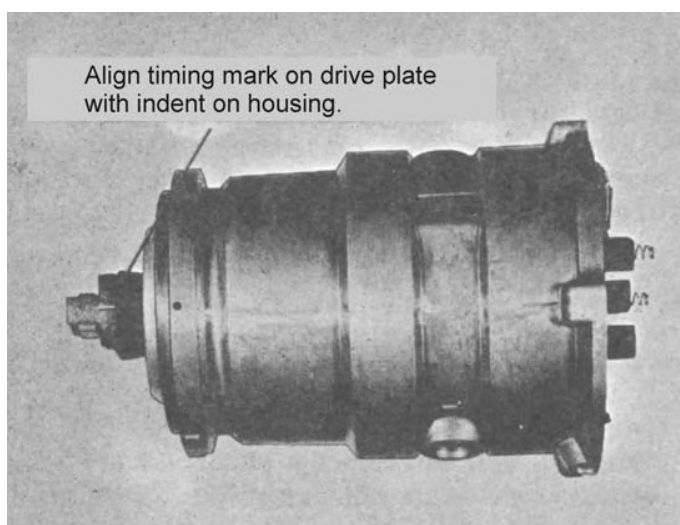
Alignment of Drive Plate and Housing Timing Marks
